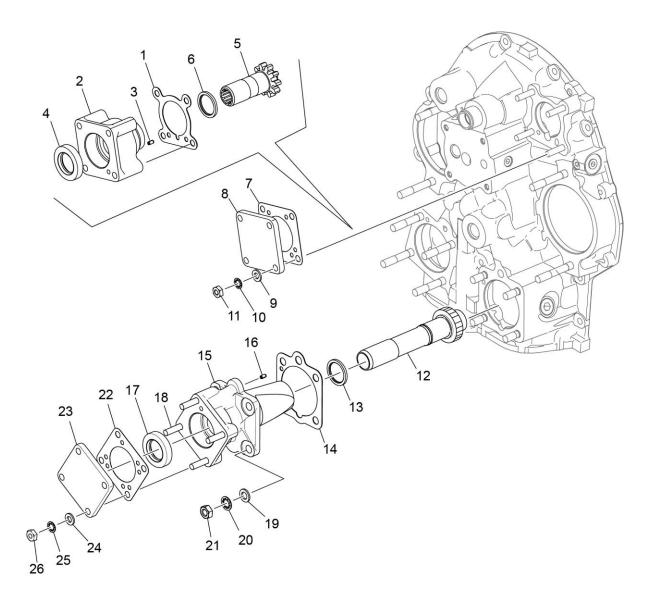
Vacuum and Hydraulic Pump Drives and Covers
